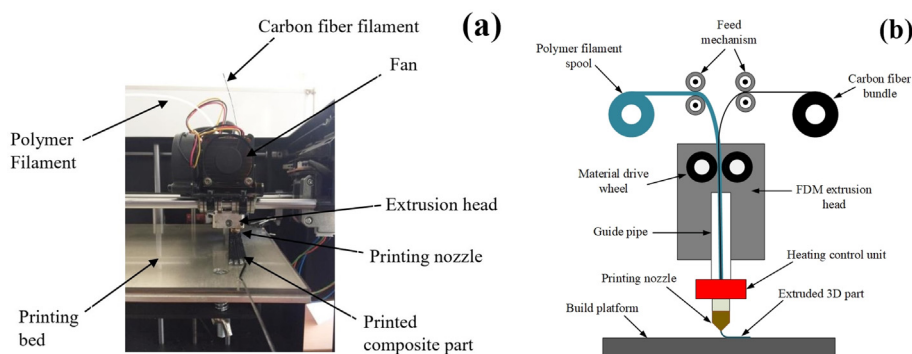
FDM 3D printing; a) equipment and printing process, b) schematic of the designed extrusion device to print CCFRPC.
